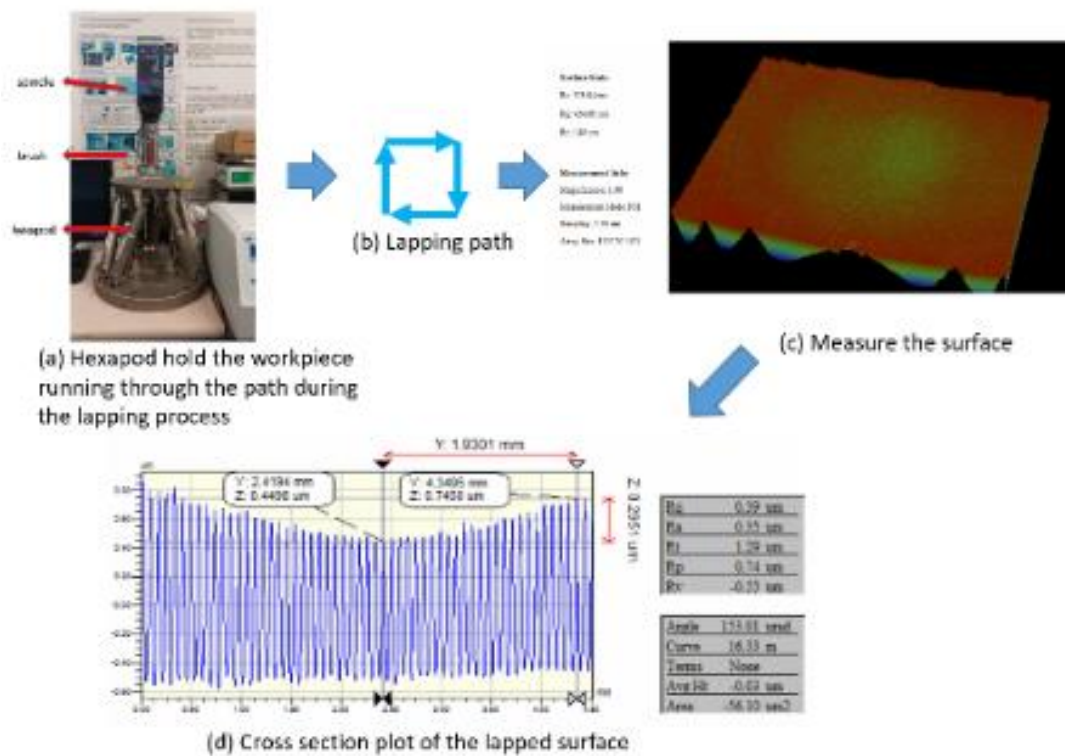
AI6061 surface lapped when the workpiece is continue moving through the lapping path
